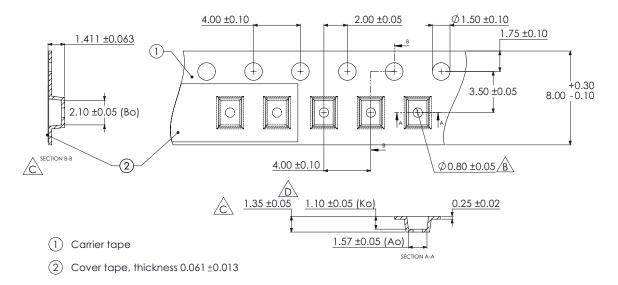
Pocket tape dimensions for L1IZ-AXXX000000000.
